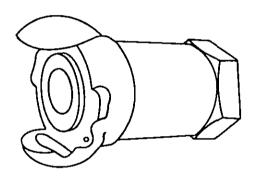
FEMALE-THREAD COUPLING, TYPE II.
